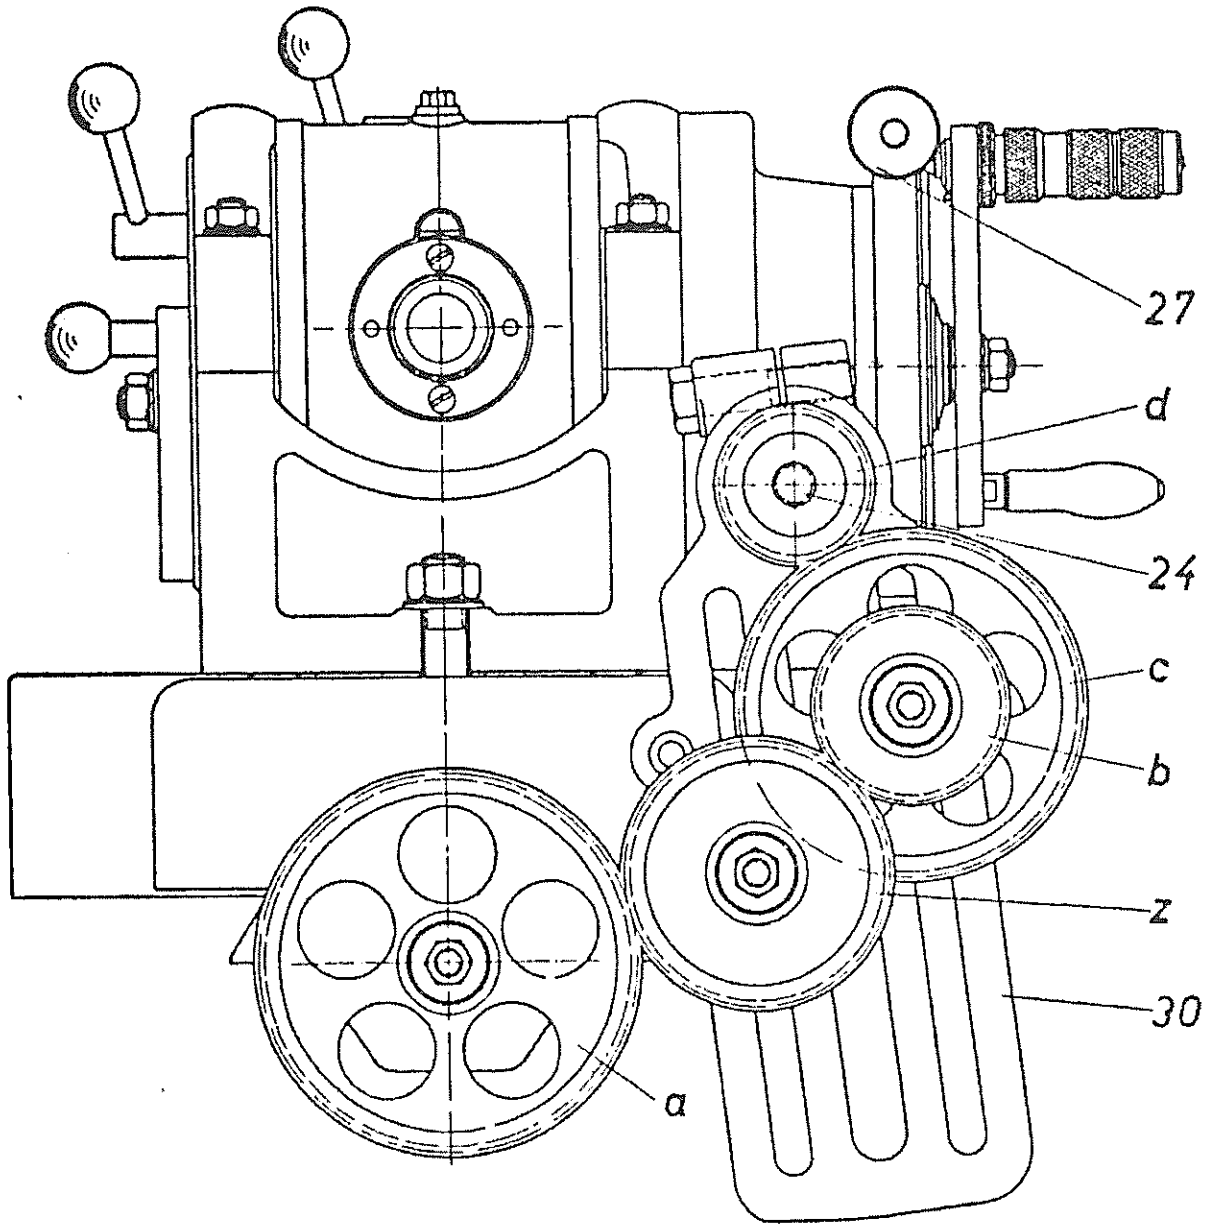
Change gears with (double transmission with 1 spiral milling intermediate gear)
